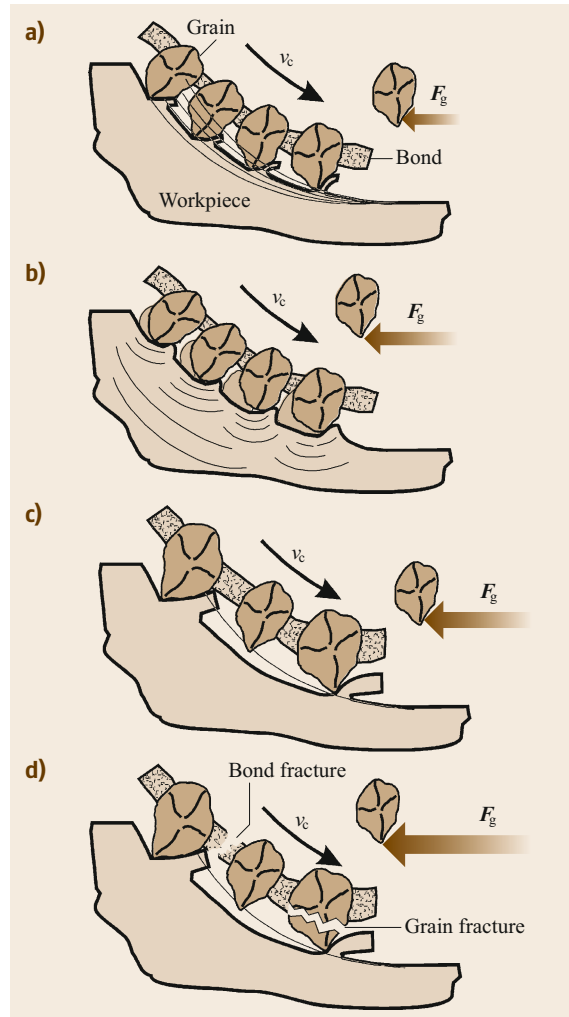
d Grinding wheel wear mechanisms: (a) sharp wheel with low load per grain, (b) dulling and loading, (c) sharp wheel with high load per grain, (d) grain and bond fracture due to very high load
